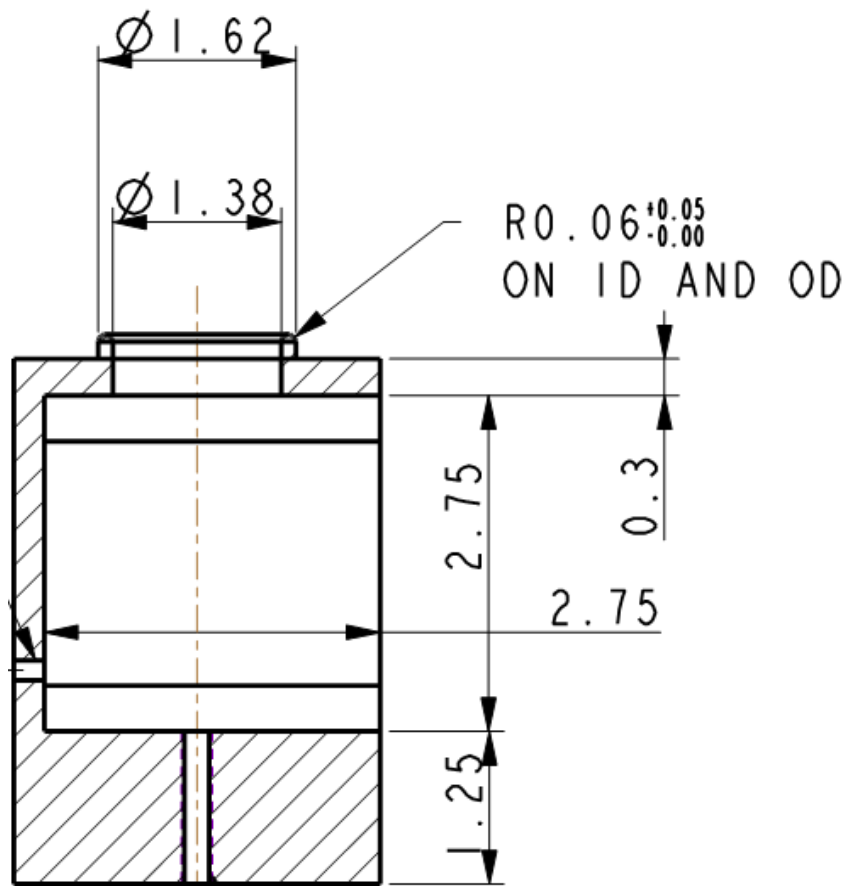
Dimensions of the support ring used for room-temperature ring-on-ring testing
